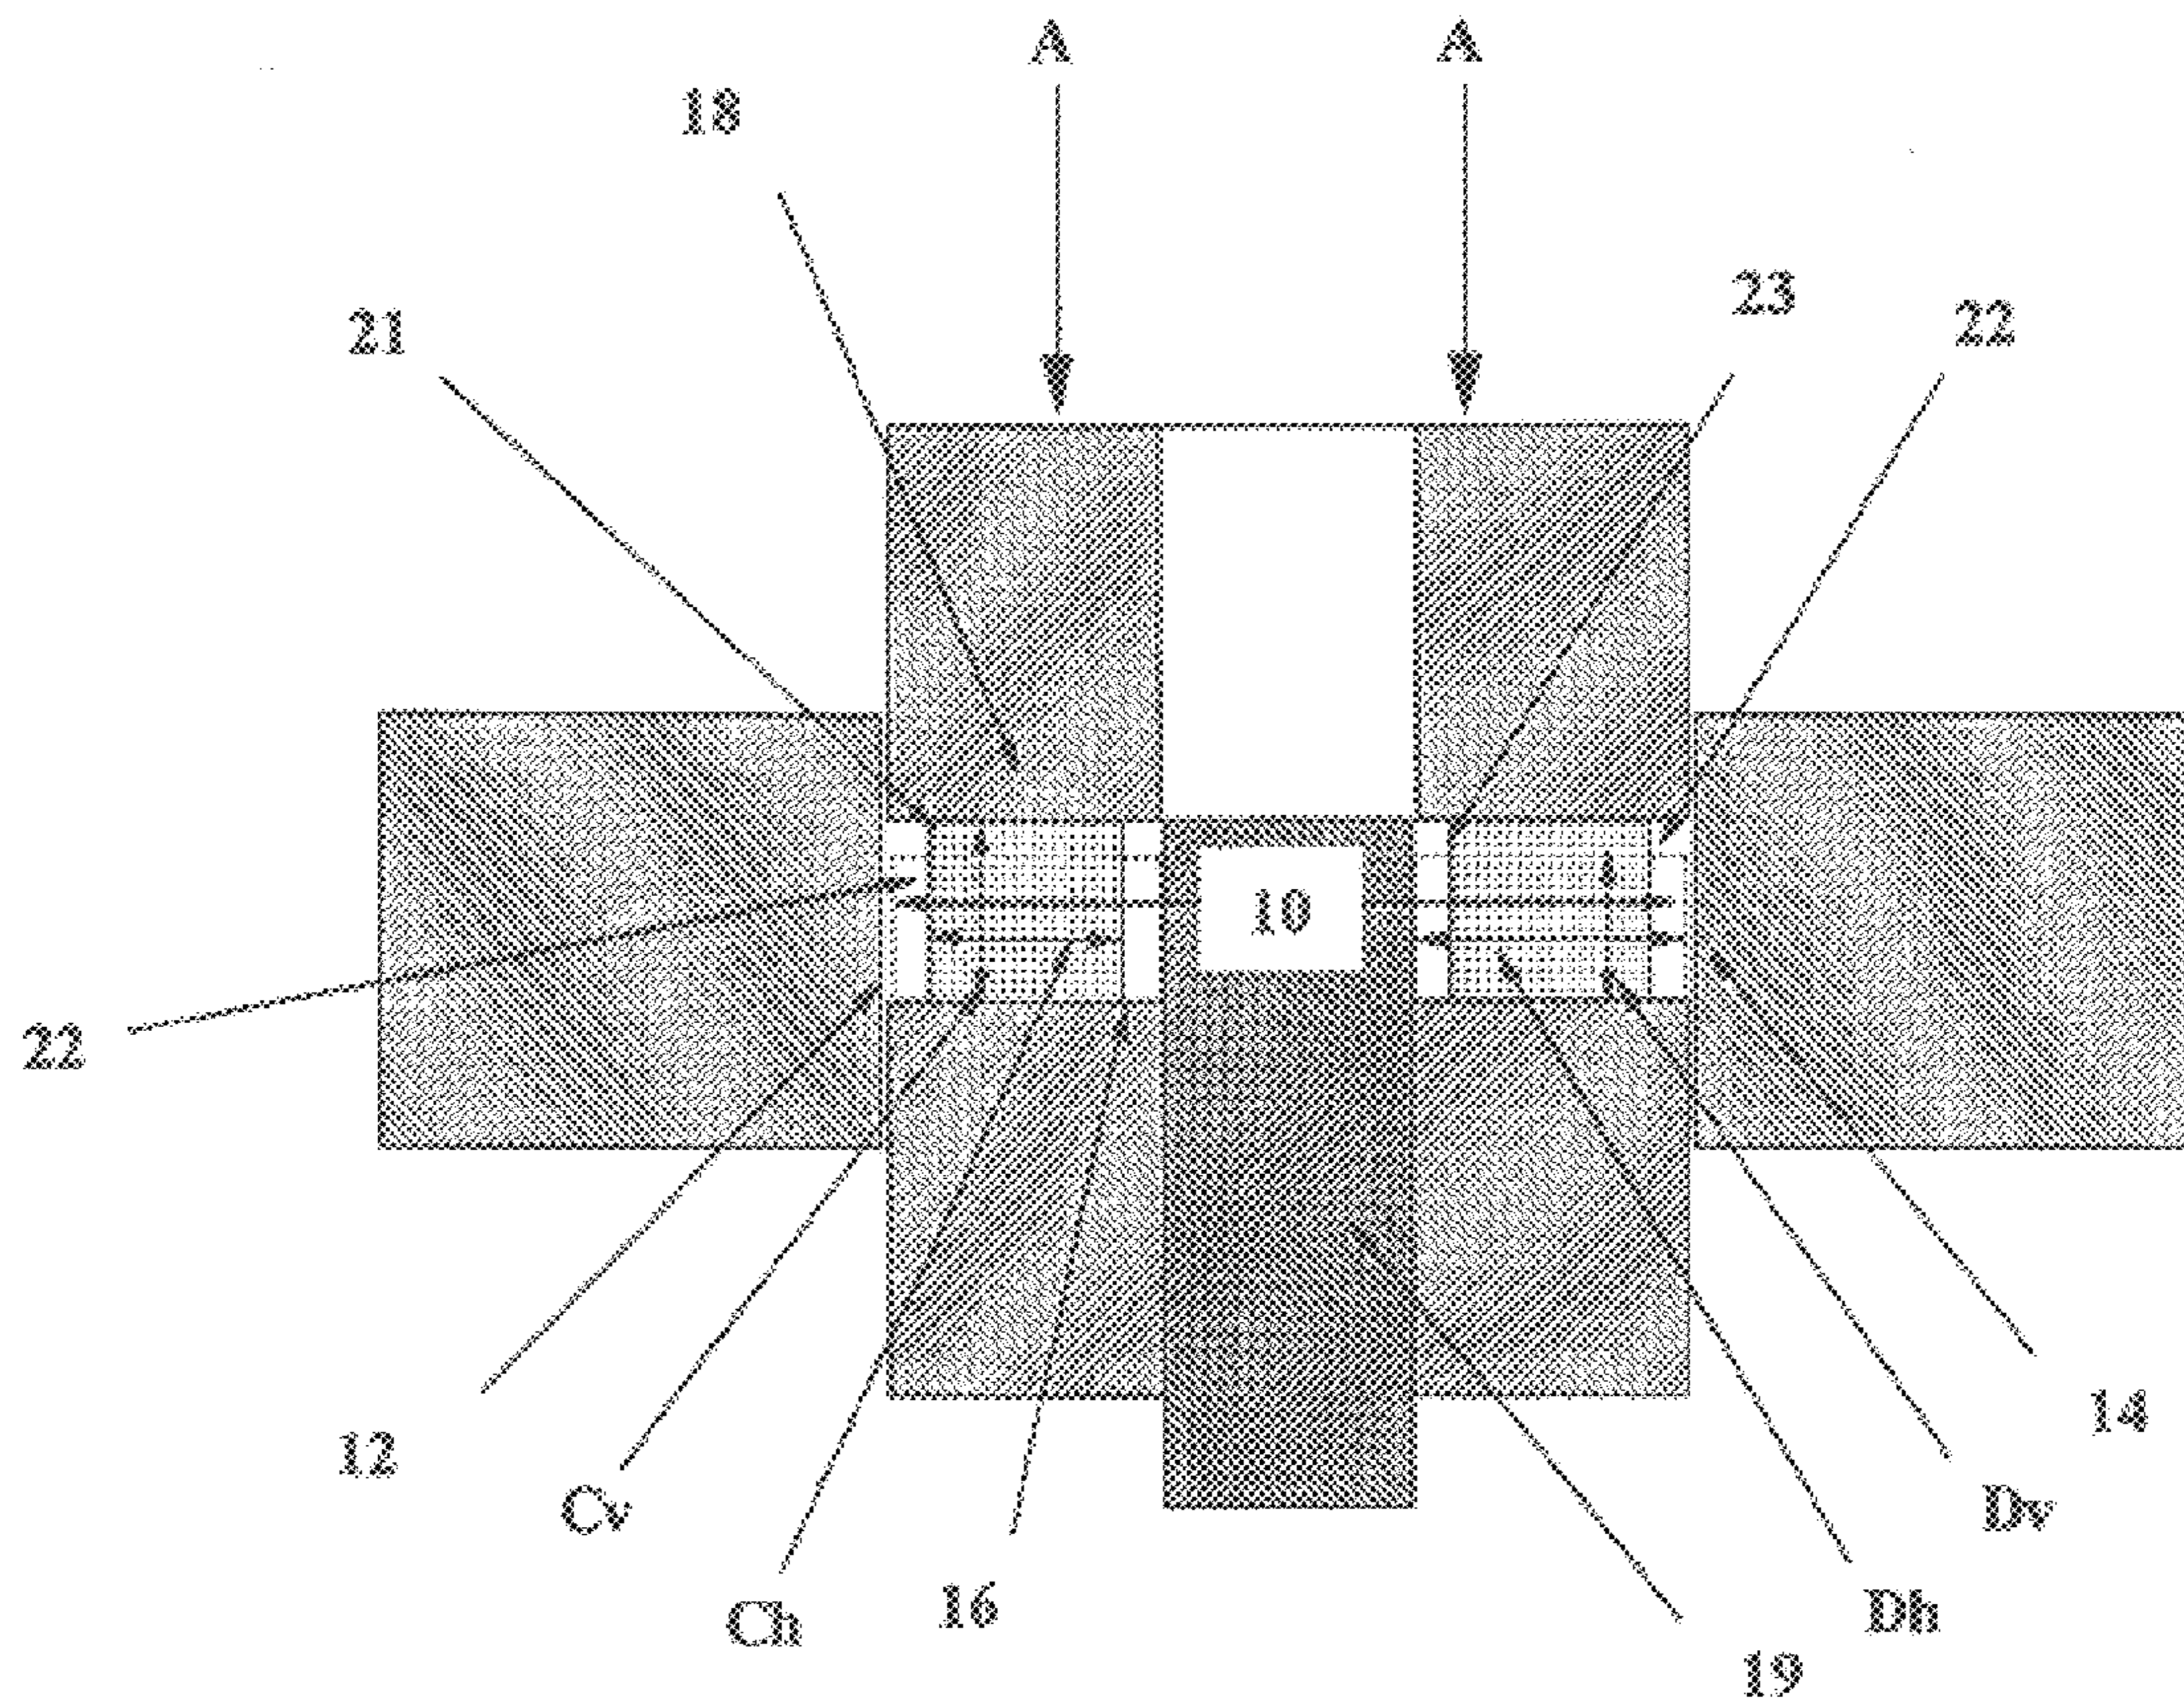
Cross sectional view of the forming process for a sintered ring.
